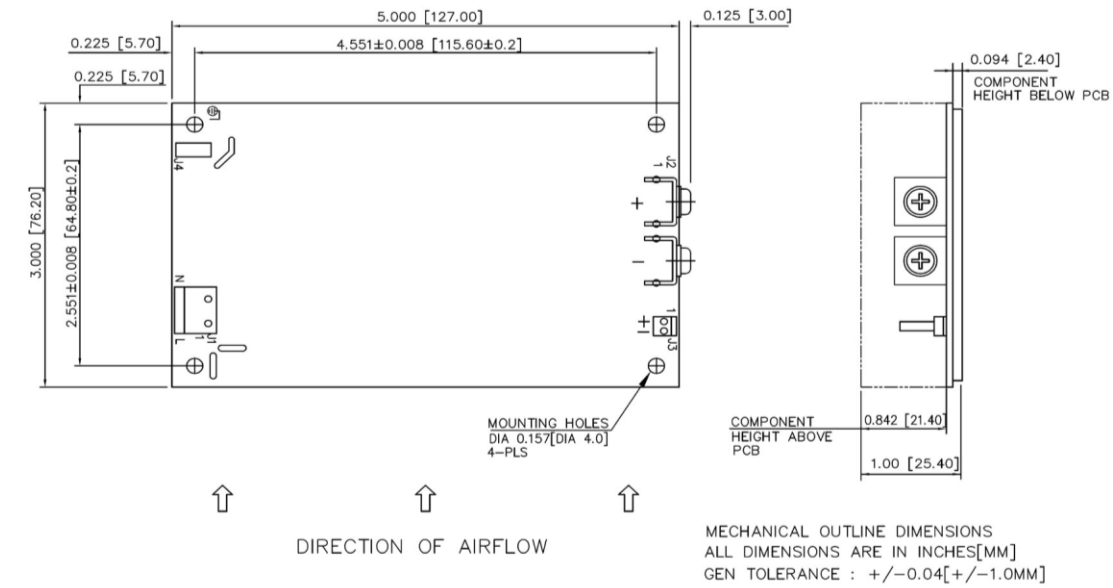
Mechanical Drawing - Screw Terminal (Option 1)
